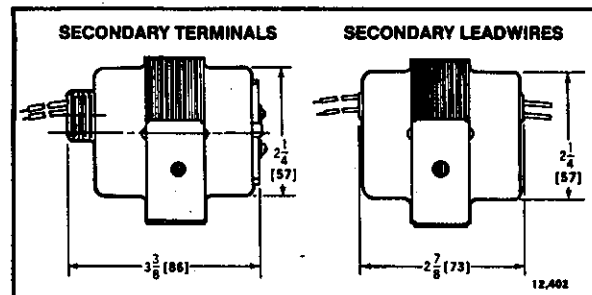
AT72D DIMENSIONS IN in. [mm IN BRACKETS] WITH FOOT MOUNTING BRACKETS.
